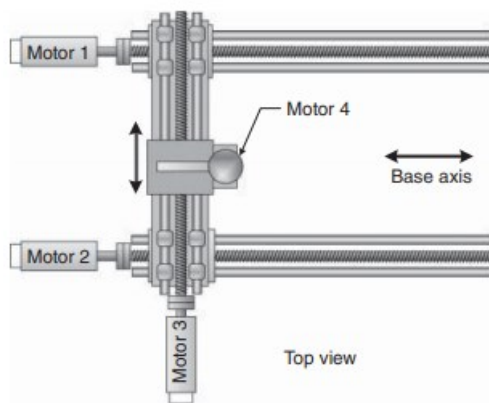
Gantry machine with two motors driving the base axis. (Gürocak, 2016)
